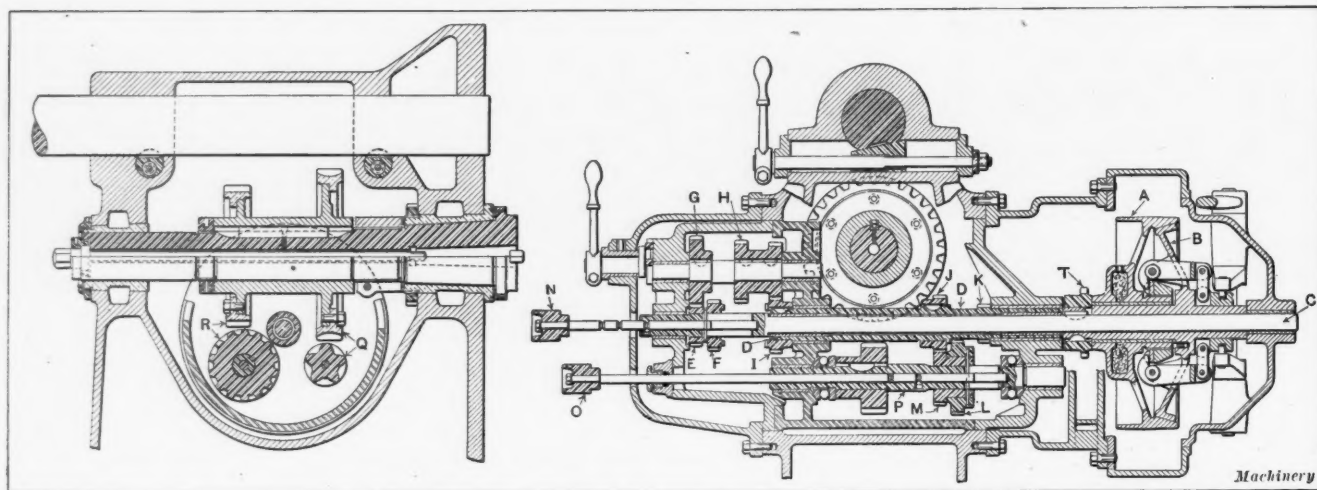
Cross-sectional View through Speed-box showing Arrangement of Change-gears
